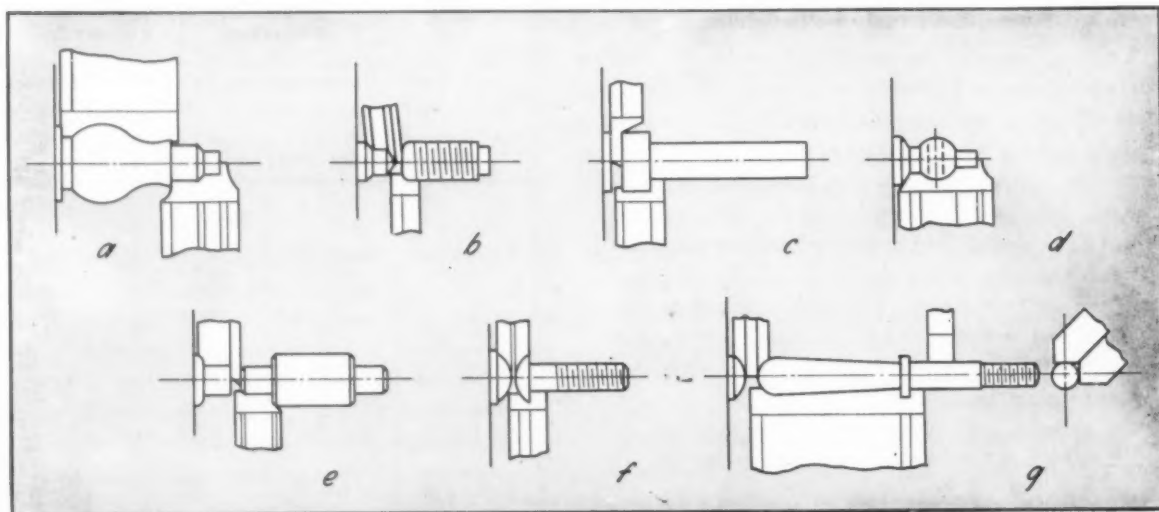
Circular form and cutoff tools perform operations such as the seven shown here.
